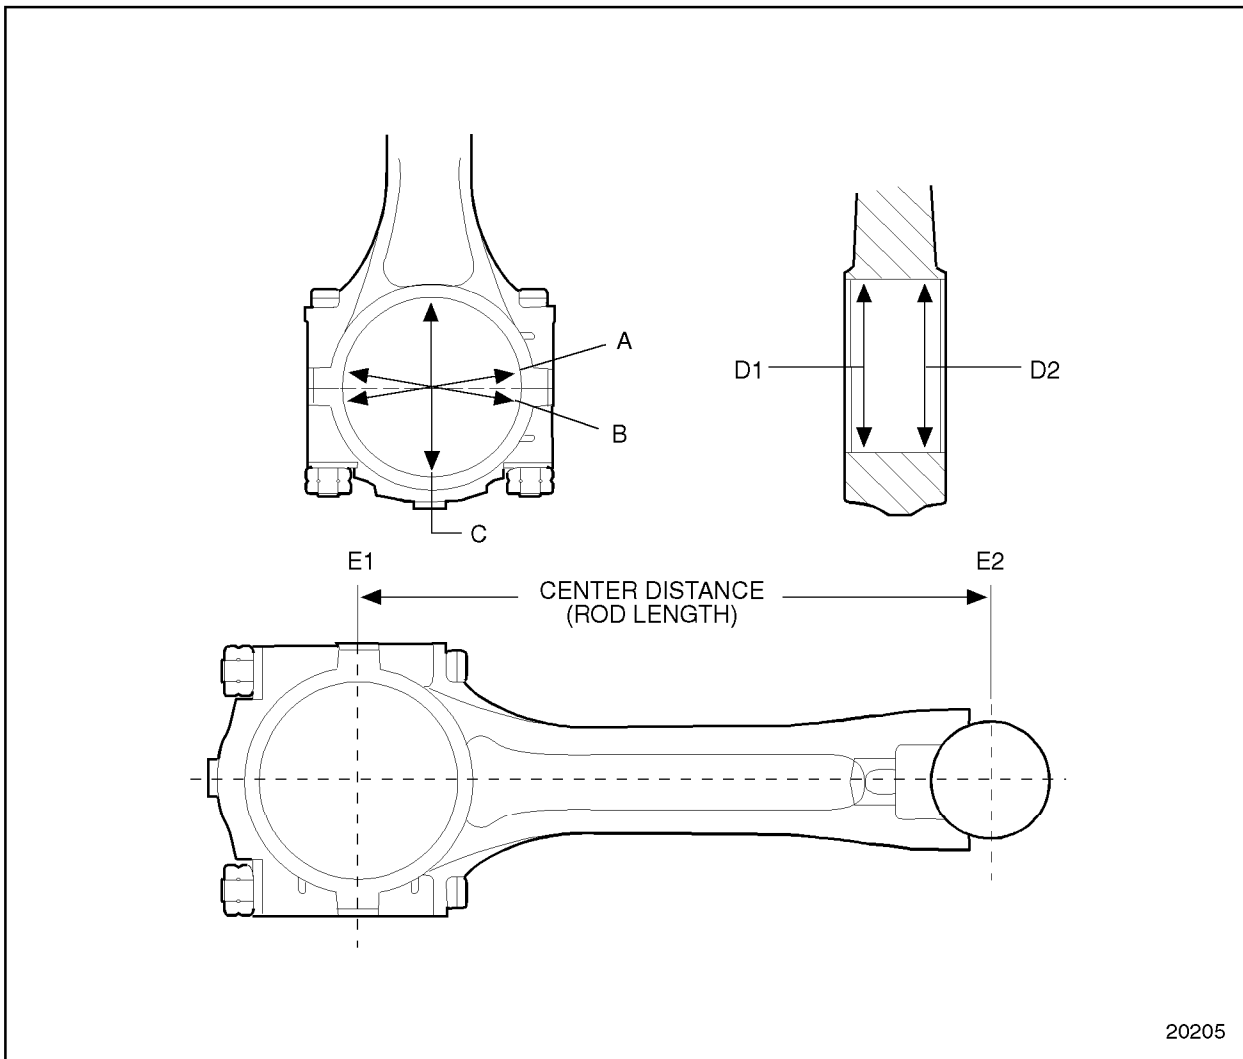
Dimensional Inspection of Cross-head Piston Connecting Rods
